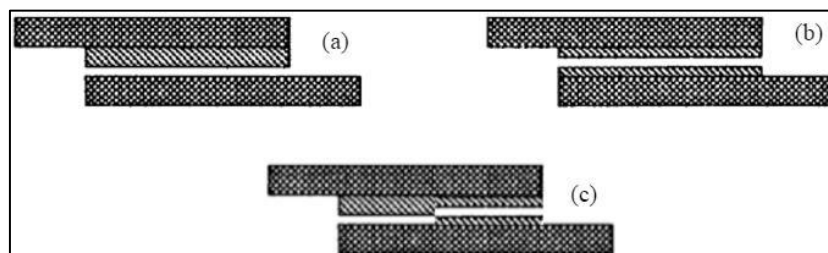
Typical failures on bonded joints: (a) Adhesive, (b) Cohesive and (c) Mix (from SILVA Figure 17).
